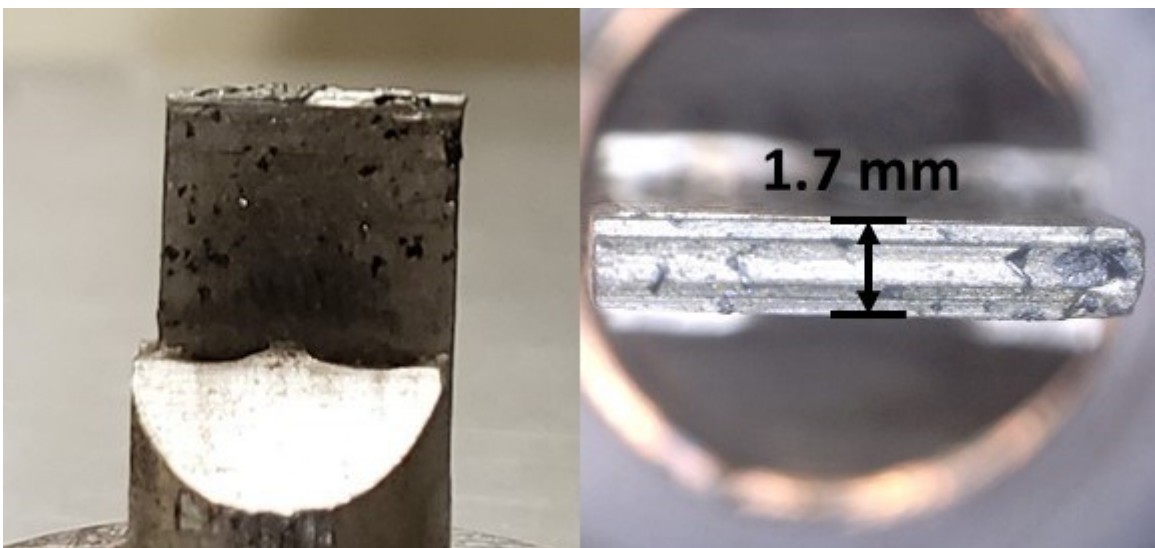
1.7 mm wide shank grit dressing tool used for grooving
